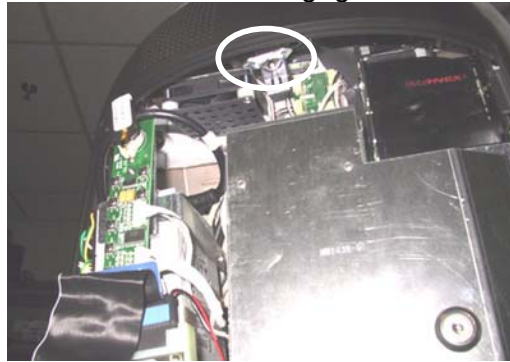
ROTARY DRAW LATCH INSIDE TOP COVER
